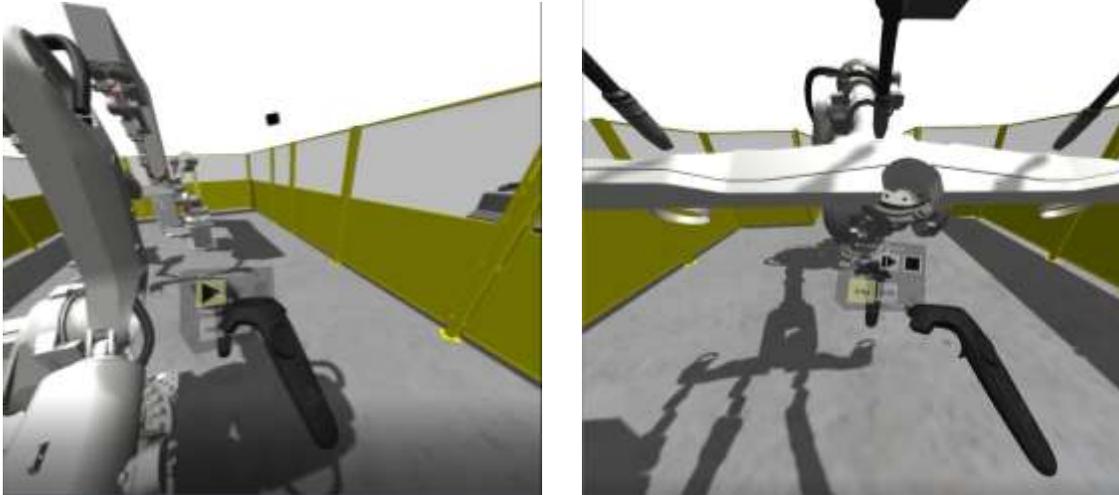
Display of HTC VIVE controller as used to spot welding through VR environment.
